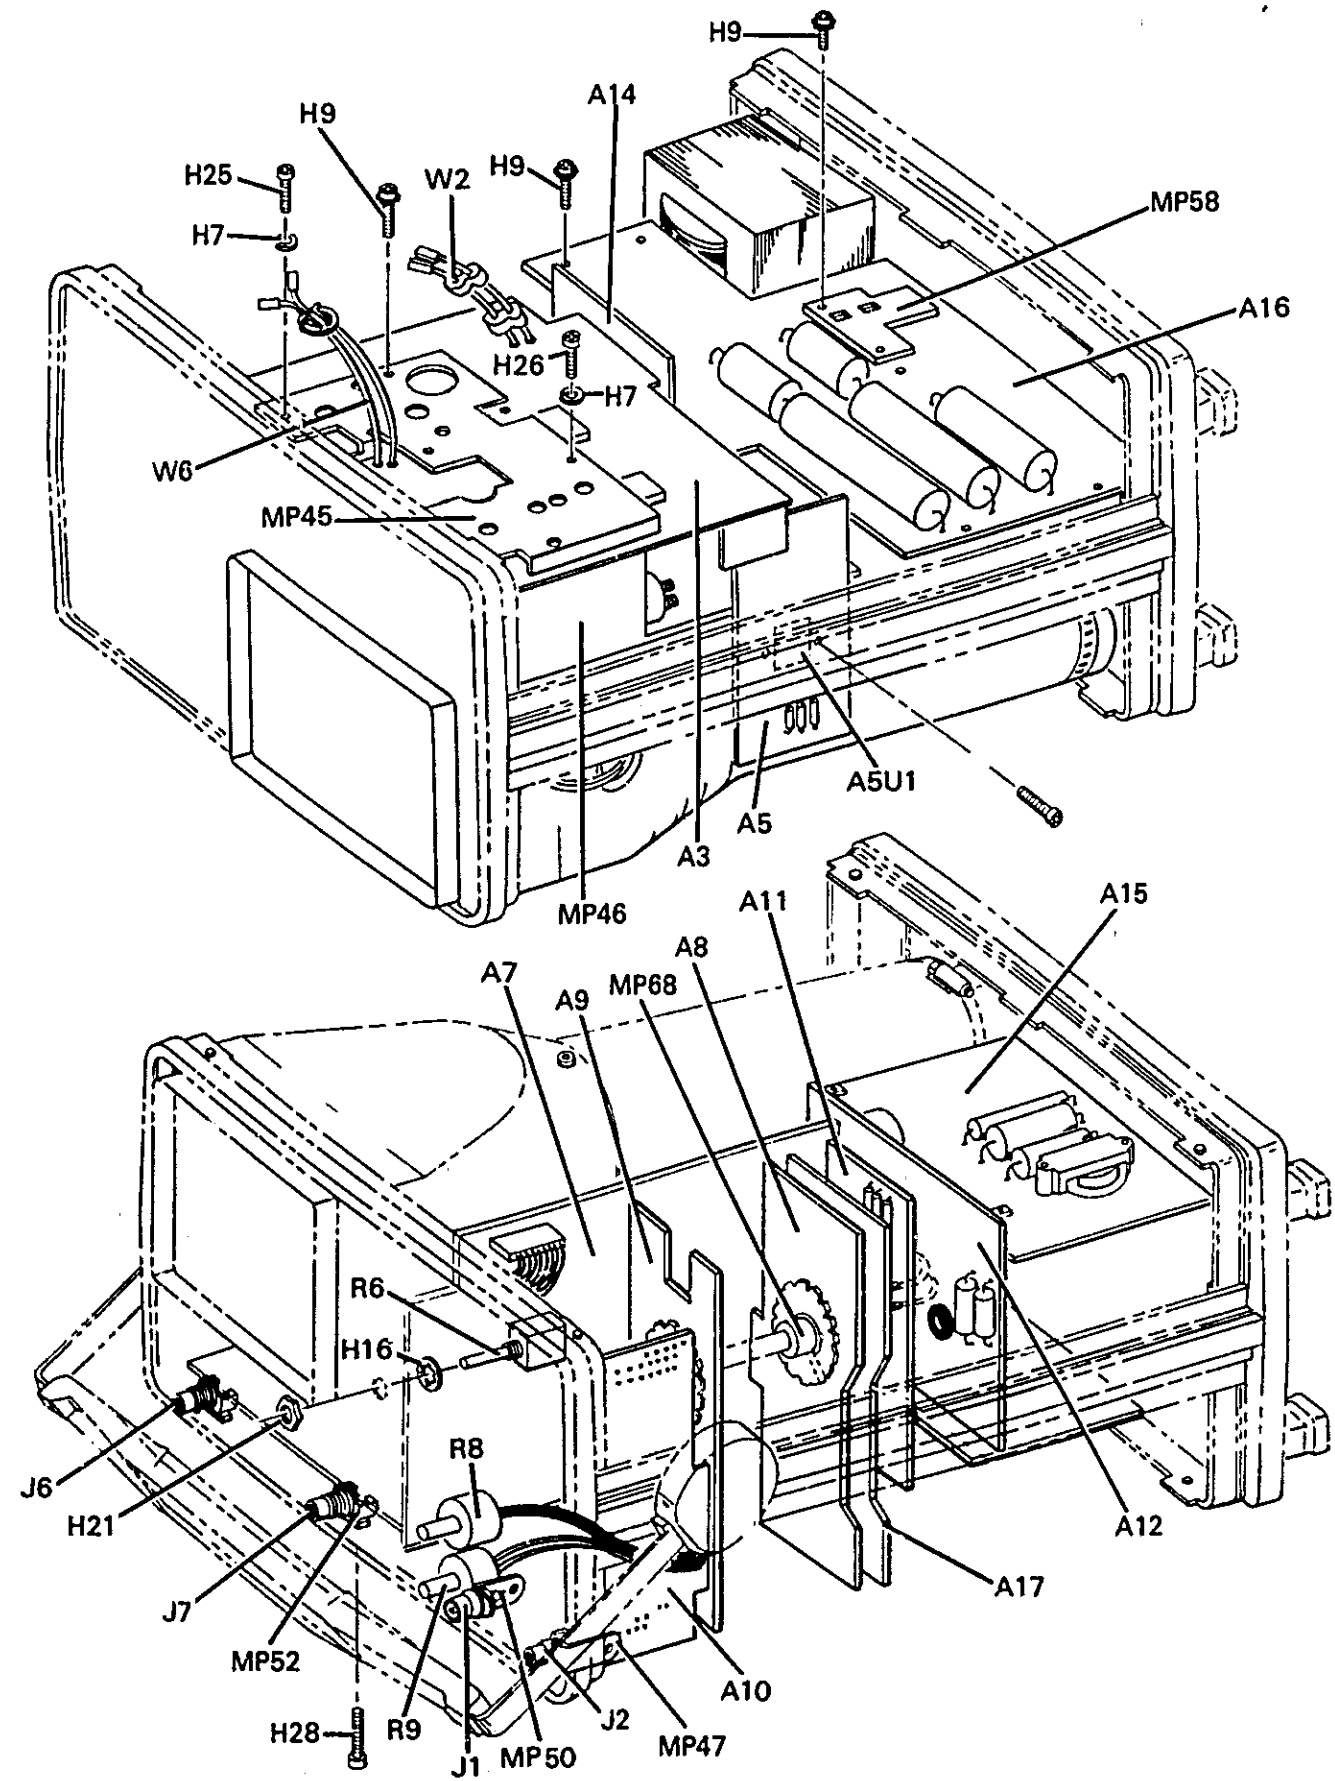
Chassis Parts and Board Assembly Identification (Sheet 2 of 2)
